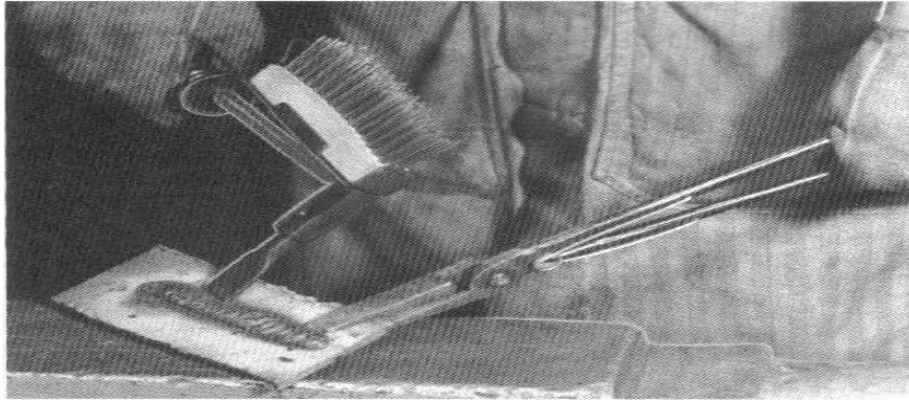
Strike the weld with a chipping hammer to remove slag.
